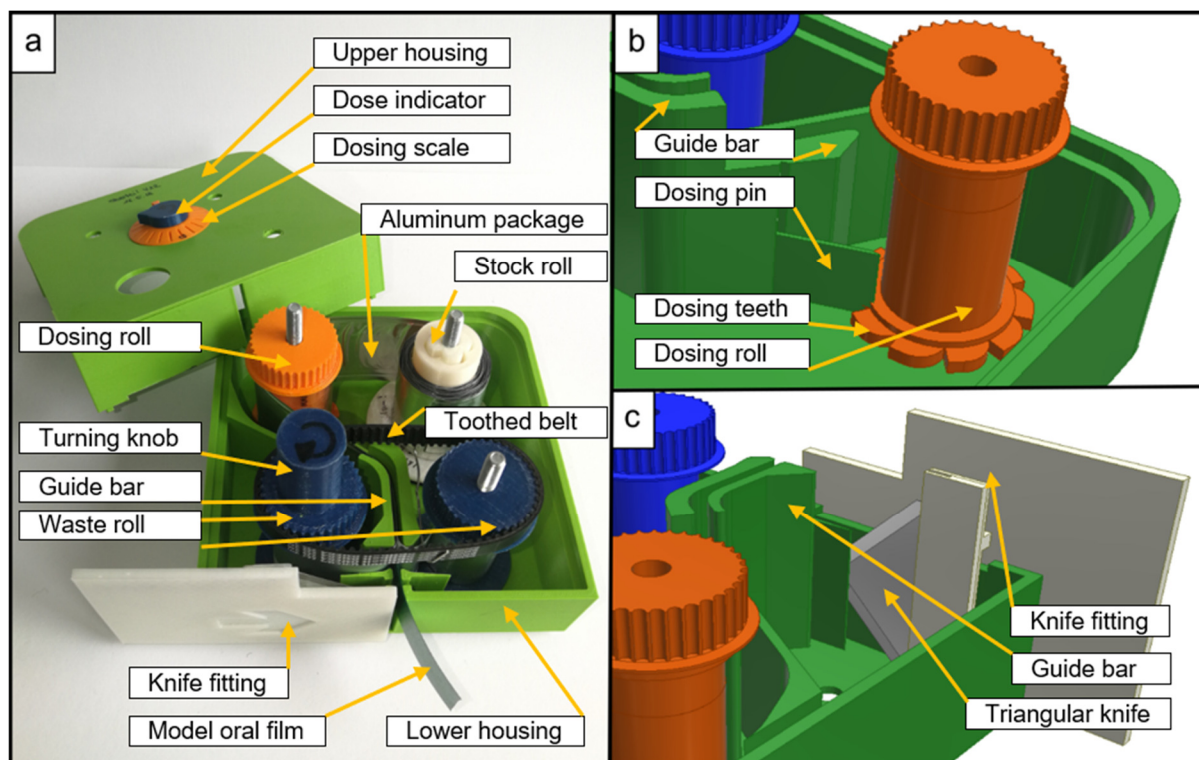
Overview of the final prototype of the developed device with a base area of 13x13 cm and a height of 7 cm. a: full top view of the printed device; b: close-up view of the dosing unit (3D-CAD model); c: close-up view of the cutting unit (3D-CAD model).
